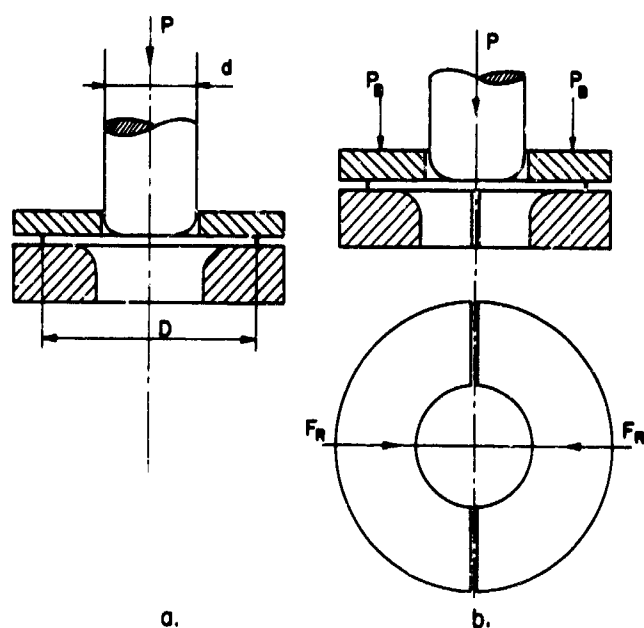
Methods of measuring friction effects in deep drawing with a blankholder.
